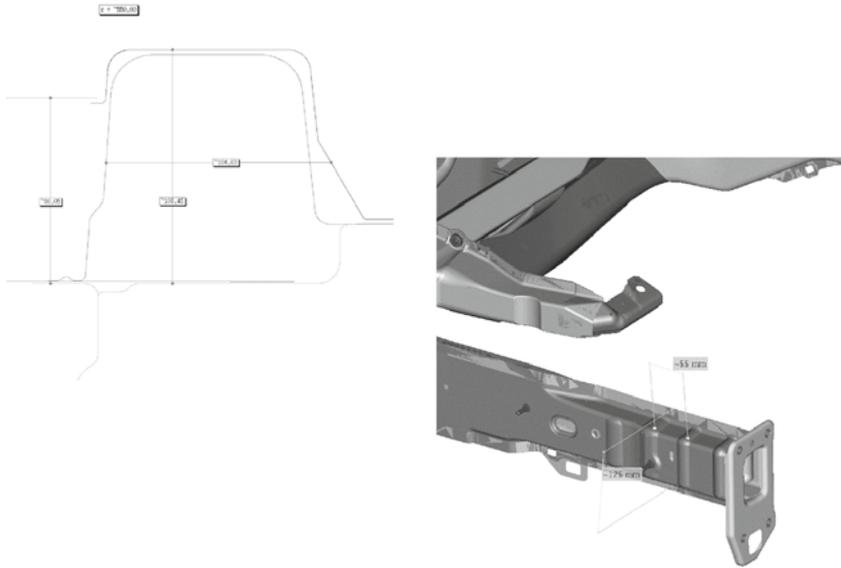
In the DMU environment, dimension measurement is easily made, to check for part geometry or gaps.
